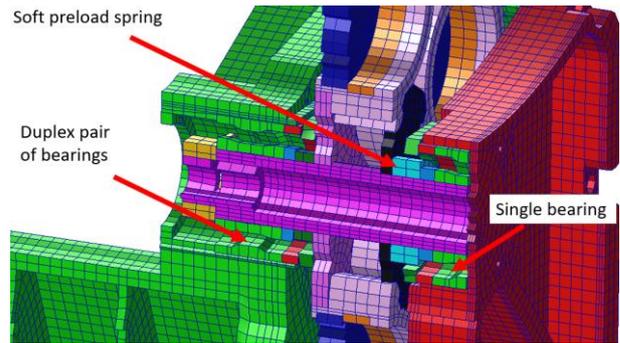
FE model of the FWA - filter wheel subassembly, shaft and bearings, soft preload spring.
